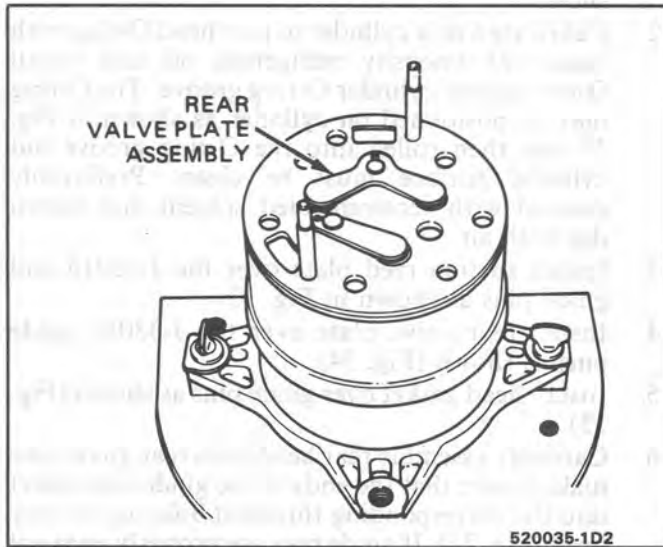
Rear Valve Plate Assembled To Cylinder Assembly
